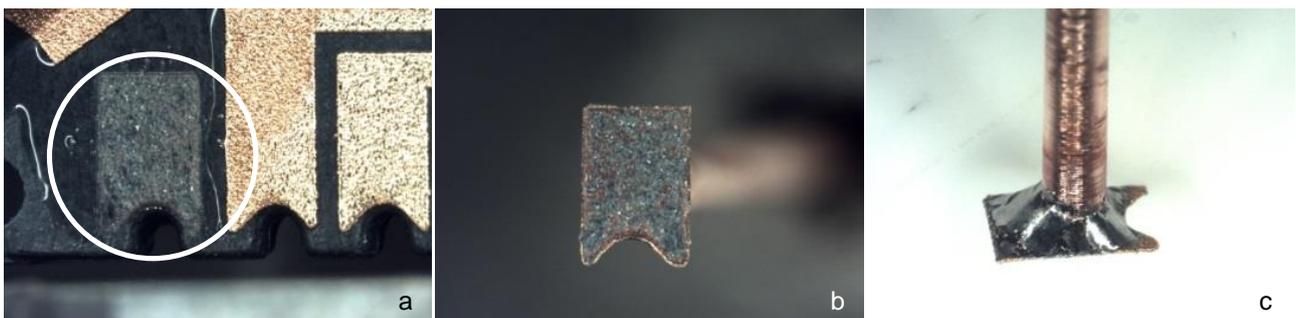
Exemplarily illustration of pin and pad after the hot pin pull test
